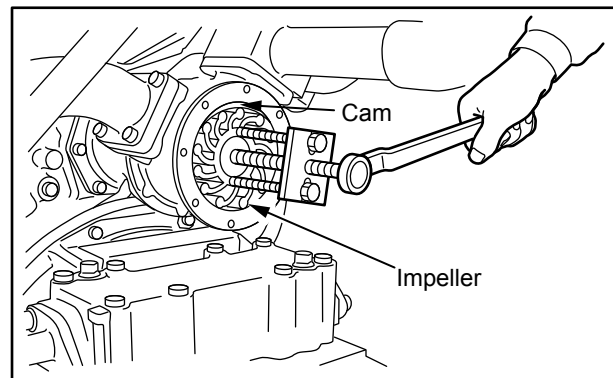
Seawater Pump Impeller - Inspect
